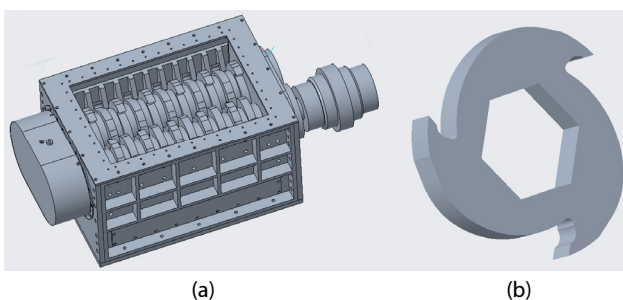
CAD modeling of the complete shredding system, (a) shredder assembly, and (b) cutting blade geometry
